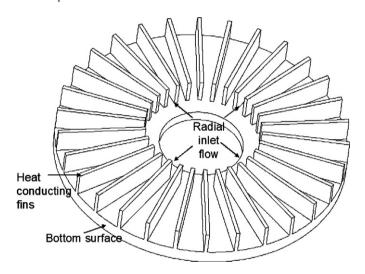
Schematic of three-dimensional heat sink with upper surface removed.
